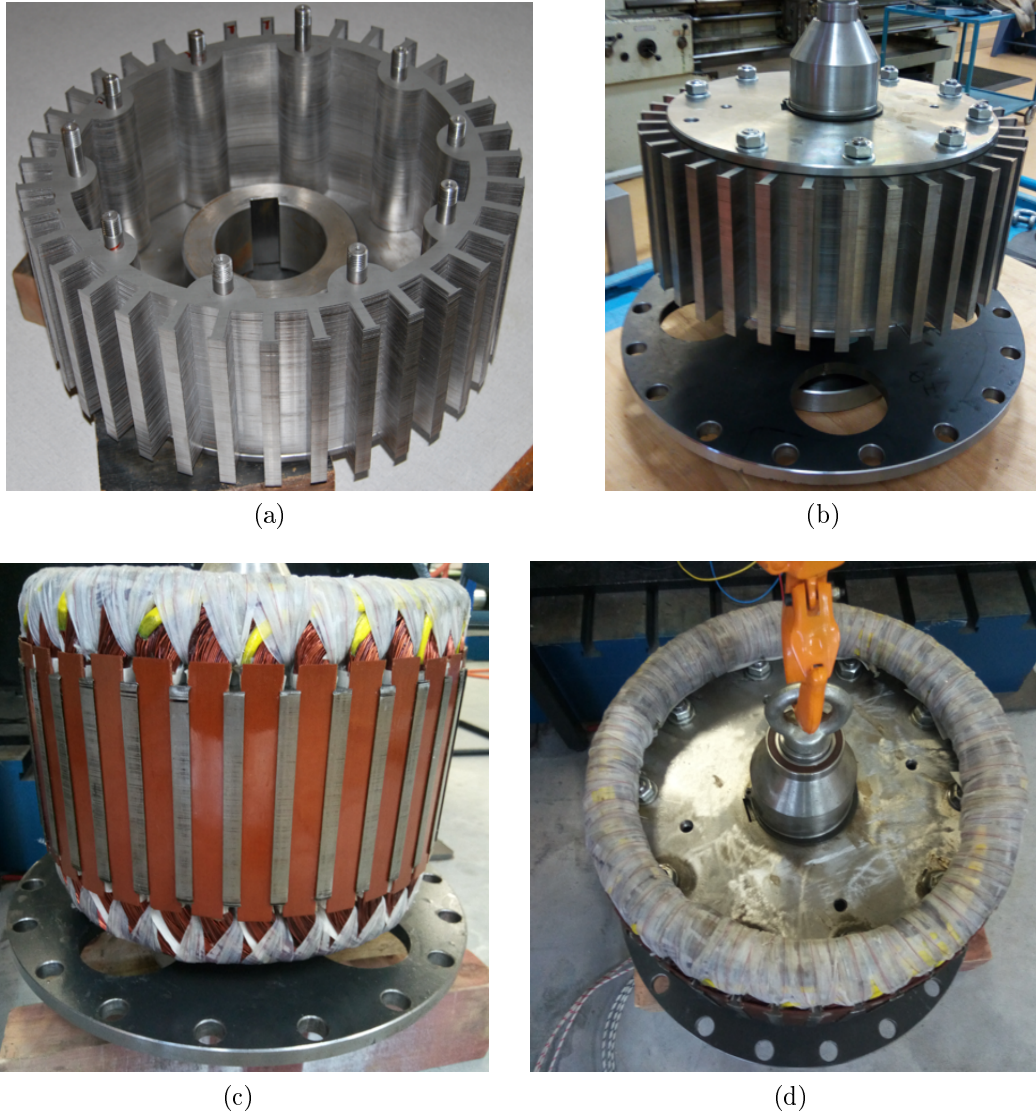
Assembling of stator: (a) stacking laminations onto the rods (b) complete lamination stack pressed with end-plates and mounted on the shaft (c) side view of wound stator with distributed overlapping windings (d) top view of end-winding overhang.
